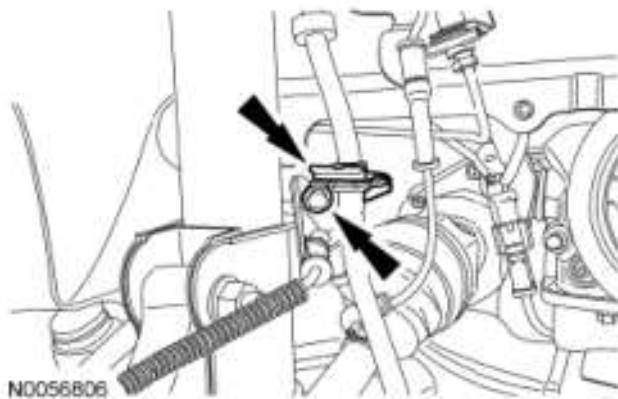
Locating Brake Hose Retainer And ABS Sensor Retaining Bolt
